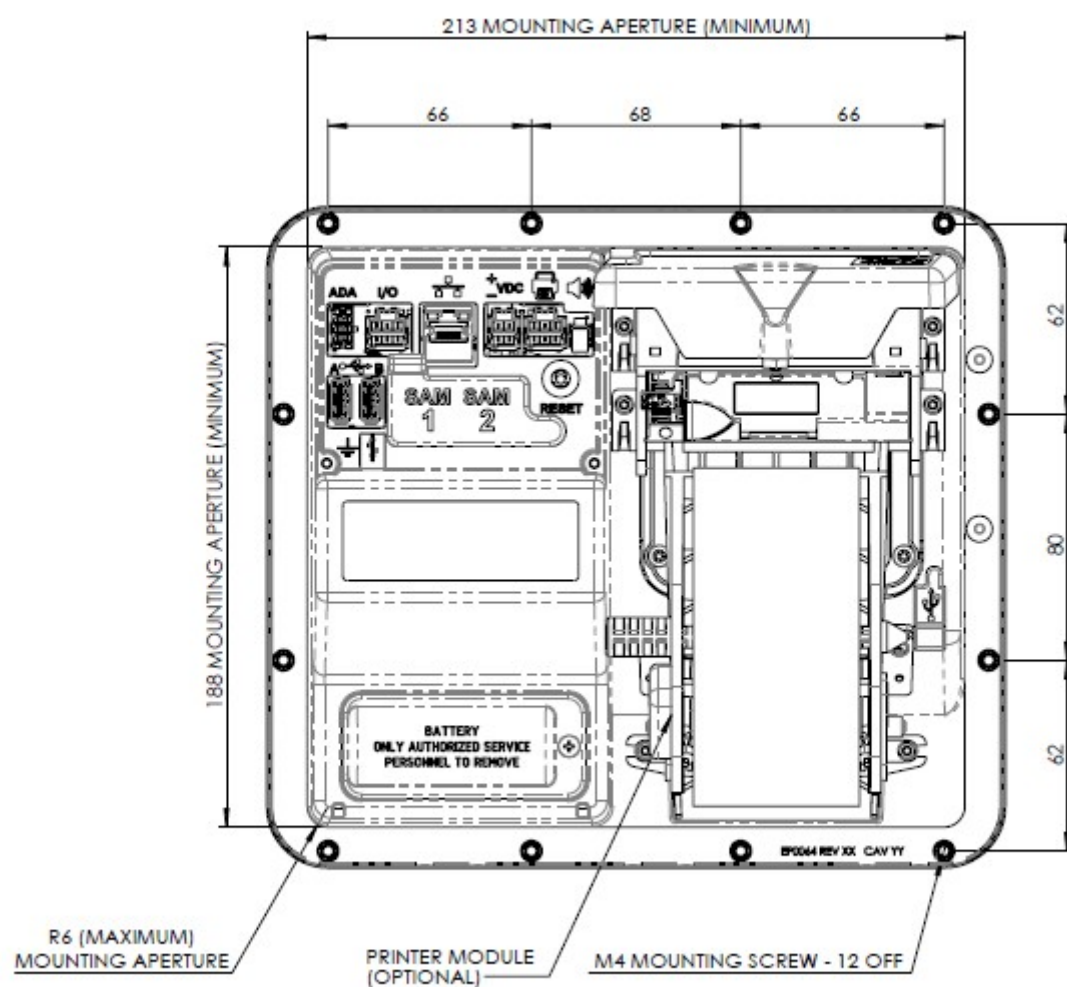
G6-300 Rear Dimensions & Mounting Points.
